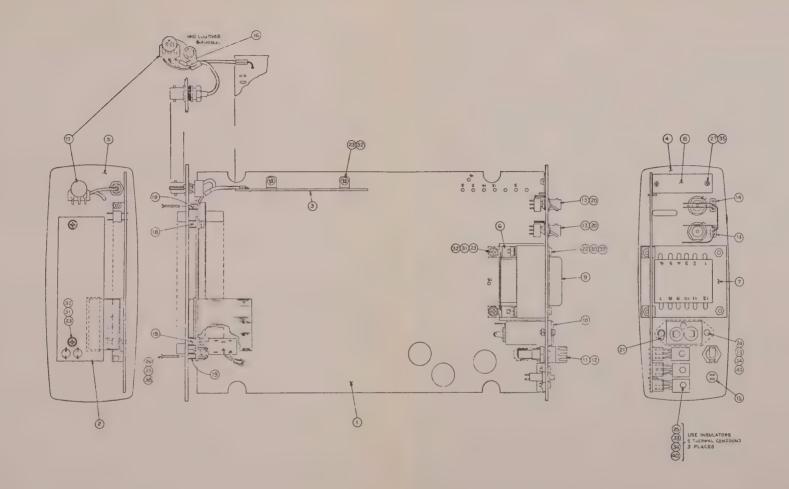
624XA UNIVERSAL CHASSIS ASSEMBLY #057575 Rev F
